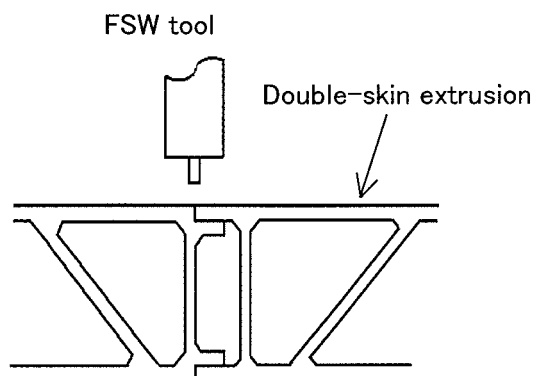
Welding procedure of double-skin extrusion by FSW.
